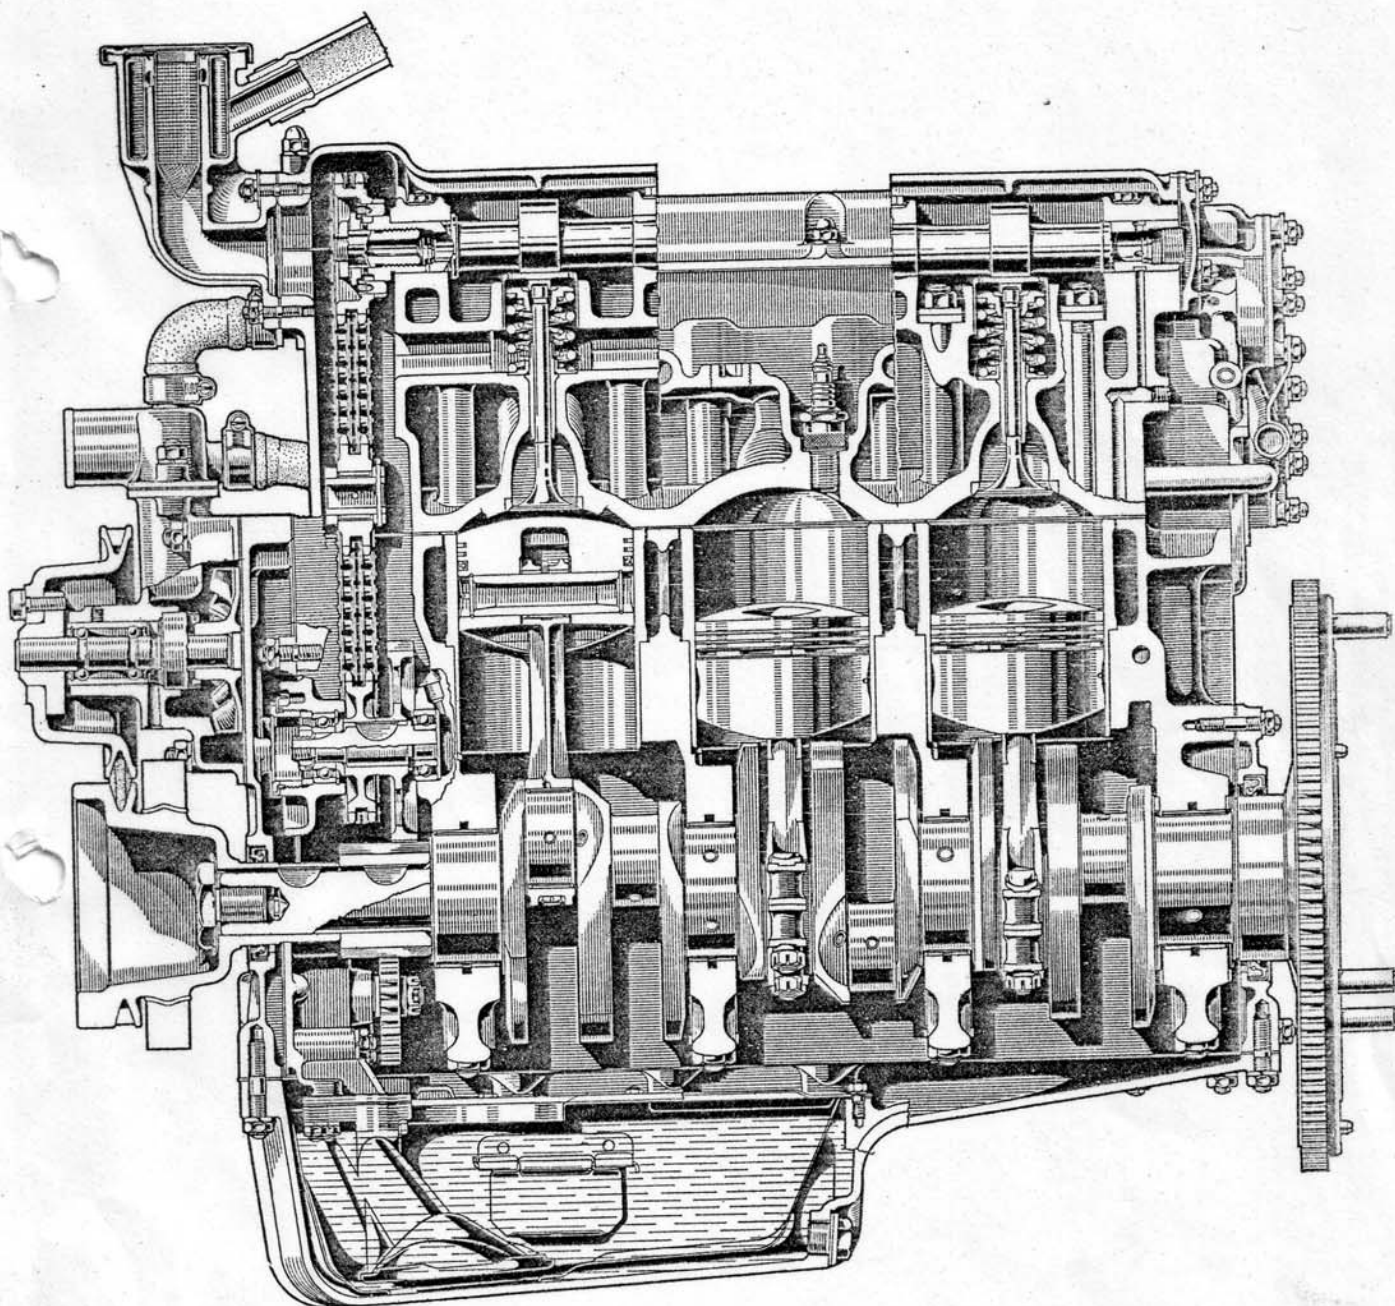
Side sectional view of engine through cylinders and one head (intake and exhaust valve), L. H. side.
